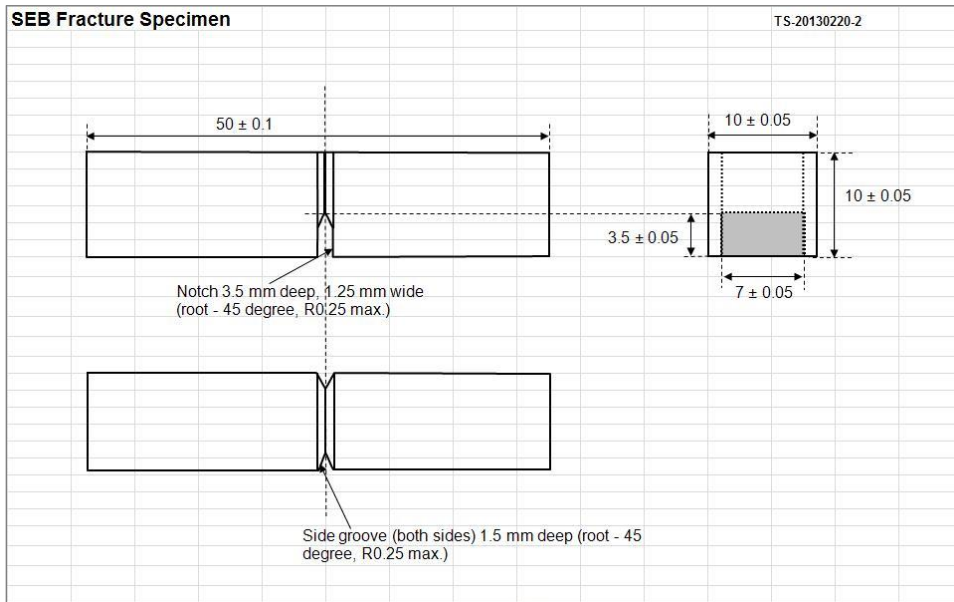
Single-edged bend bar (SEB) specimen for static fracture resistance (J-R) testing
